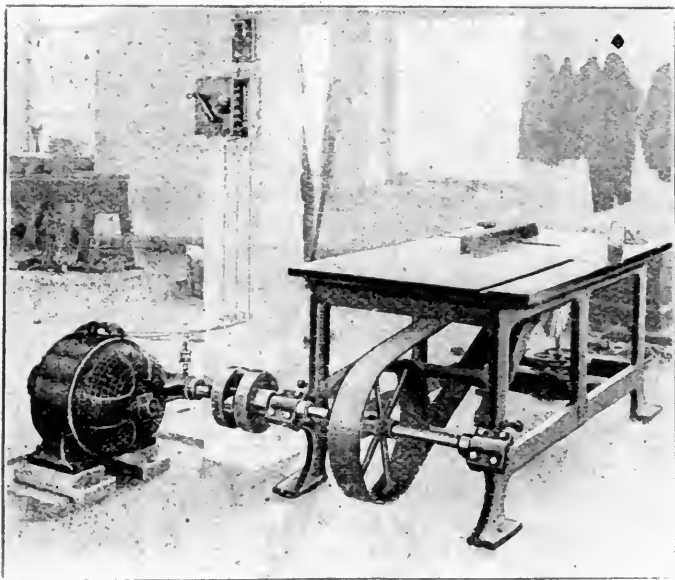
A 12-INCH RIP SAW WITH A DIRECT-COUPLED DRIVE FROM A 10-H. P. BACK-GEARED MOTOR.
